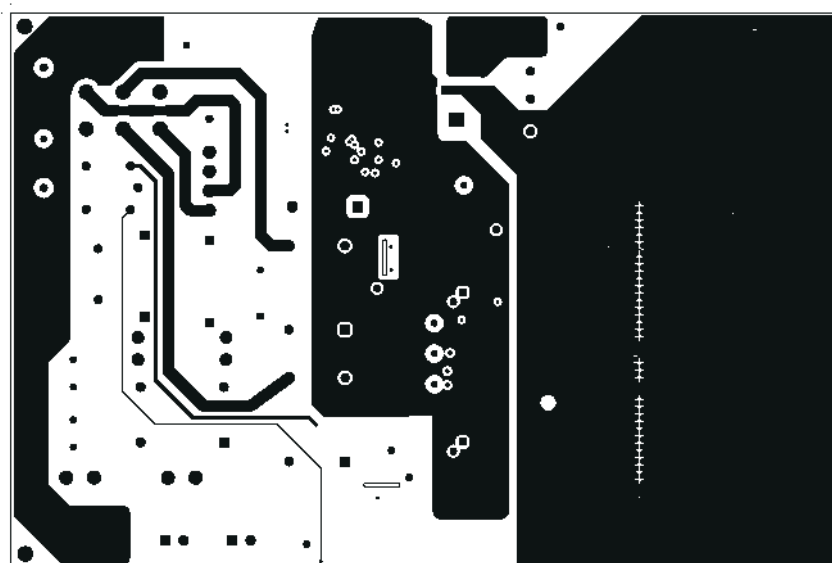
UCD3138PFCEVM-026 Bottom Assembly Drawing (bottom view)
